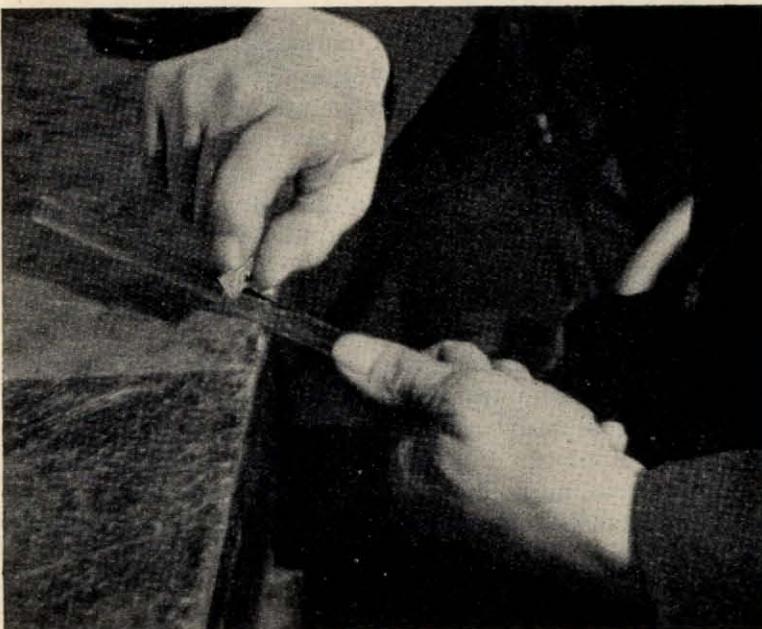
THE METHOD OF USING A GLASS-CUTTING KNIFE
